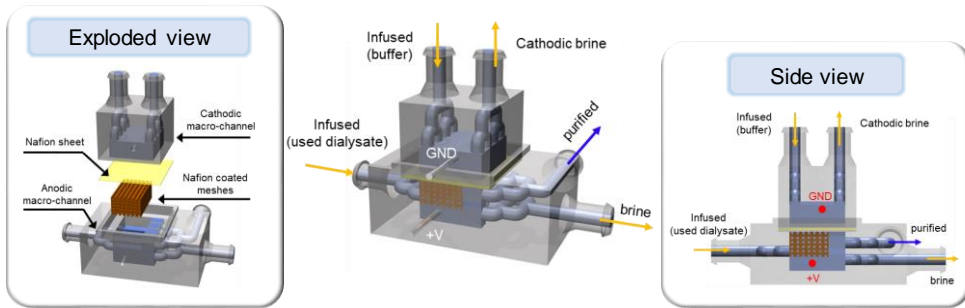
It is a high-capacity two-branch ICP device designed using a 3D printer. On the left is the exploded view of the device, which is output in two parts and assembled with mesh and nafion sheet. The right side is the side view of the device, designed to keep the ICP stable.
